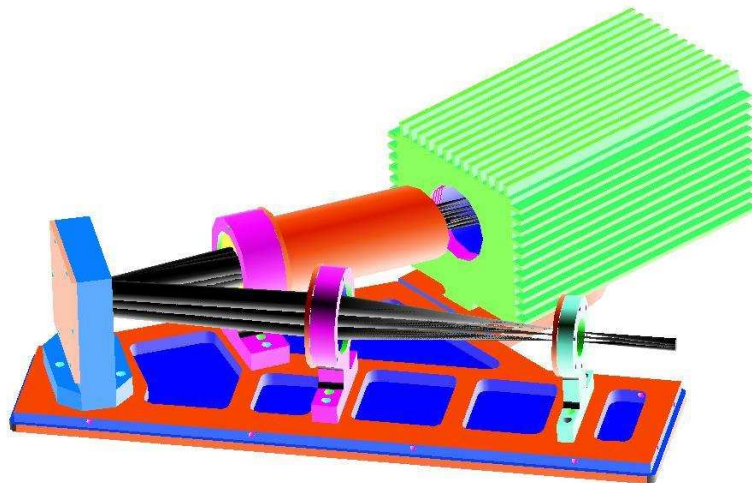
The mechanical design was concerned with weight, rigidity and volume. To reduce weight, metal was milled out over large parts of the optical bench. The camera sits in a tightly toleranced channel on the shoulder, thus making the assembly very repeatable.
